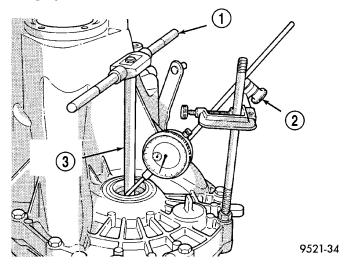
Checking Differential Bearing End Play To Determine Shim Thickness
